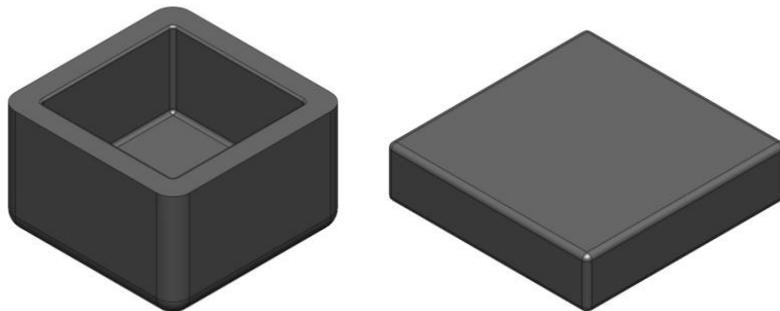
View of insulation pieces used in robust EDR, main upper housing and cover.
